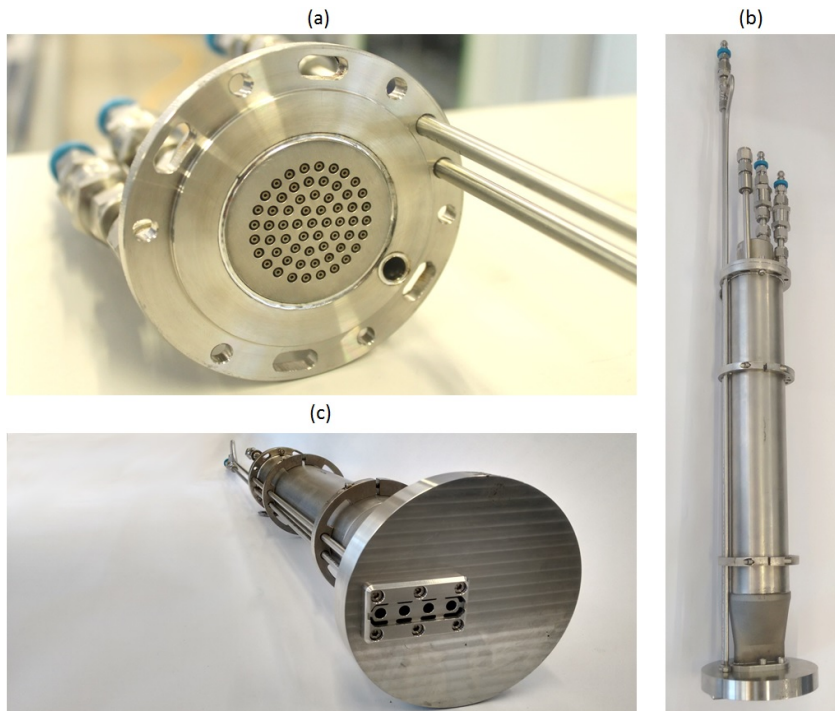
Pictures of the designed hybrid drill head equipped with a dummy bit face without mechanical cutters and drilling mud nozzles. (a) Picture of the burner and the upper flange, on the lower right the igniter tube is visible. (b) Side view of the burner assembly. (c) View of the bit face with the distribution box.
